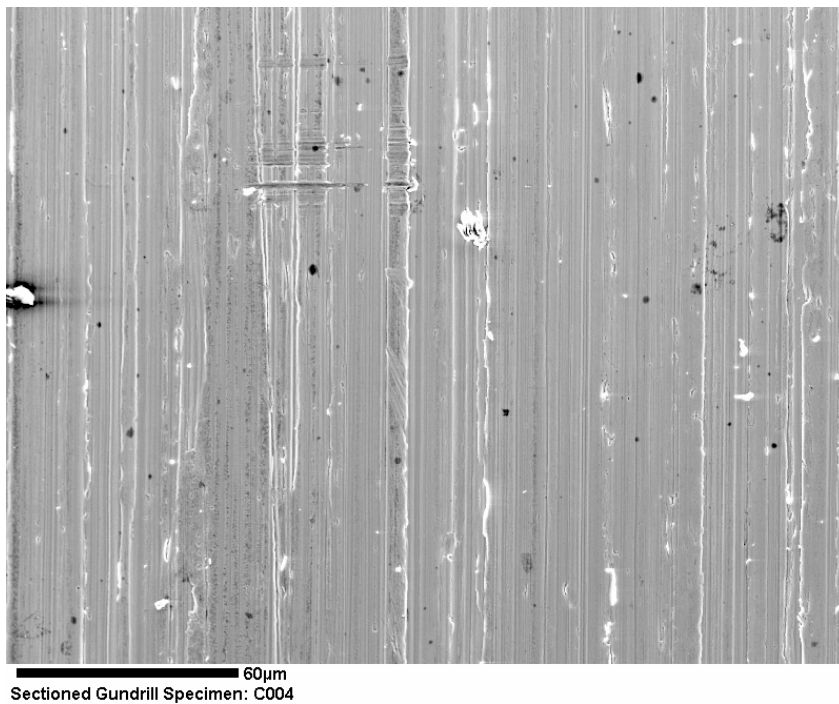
A 500X SEM image of the seventh hole drilled in 21-6-9 forging with 50-50 oil at 0.5 in/min, and 11,000 rpm on TBT gundrill machine in another department.
